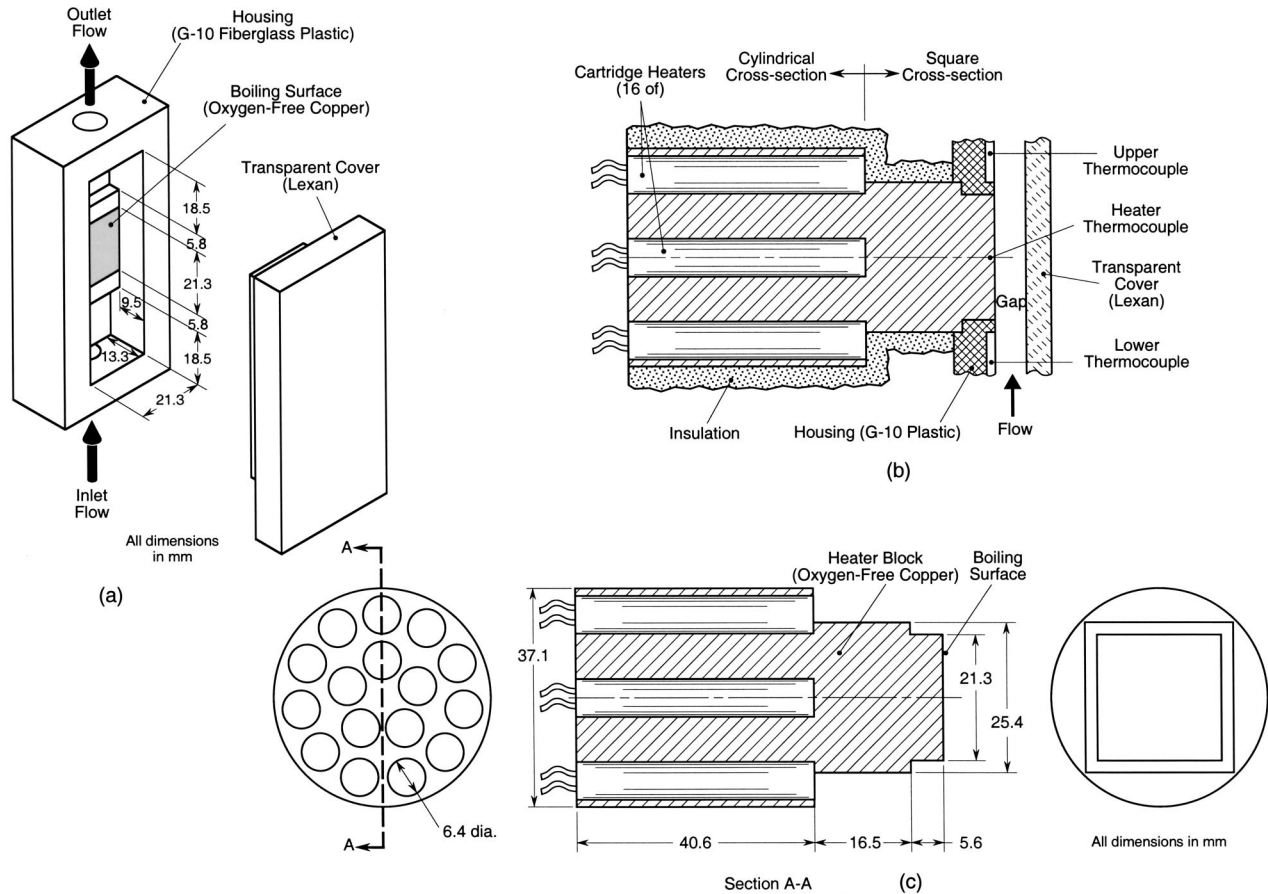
Details of (a) housing, (b) sectional view, and (c) heater of test module
